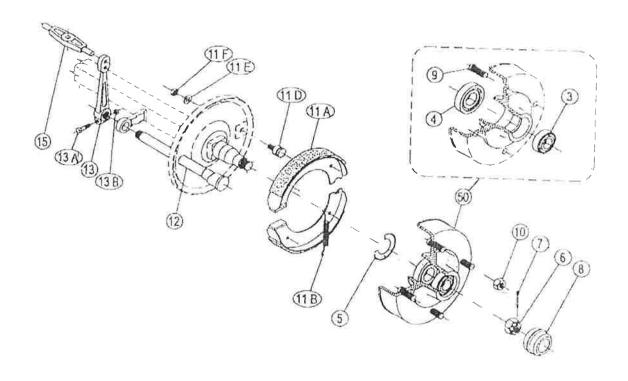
FRONT AXLE SUBASSEMBLY (P/N 2027402)
